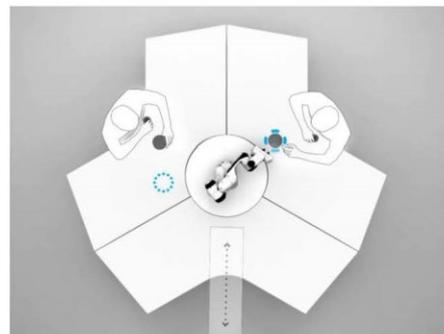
The concept of the prototype of an assisting workplace for HRC. It includes an integrated Franka Emika robot handling tools and work-pieces which have been delivered by a conveyor belt.
